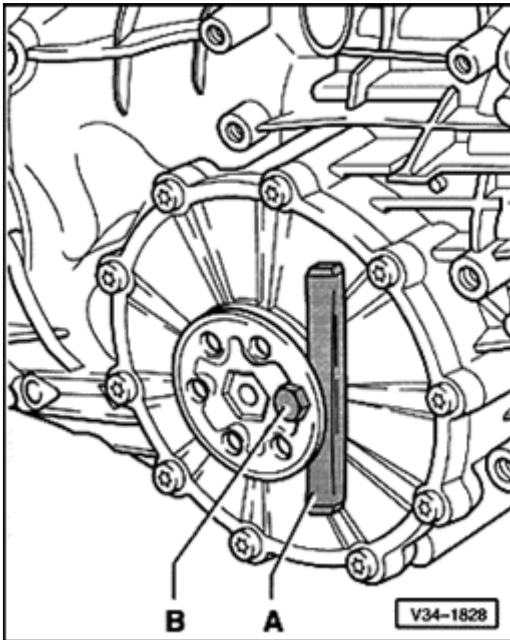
Placing Chisel Or Suitable Spacer Under Flange Shaft And Pulling Flange Shaft Out By Turning Bolt
